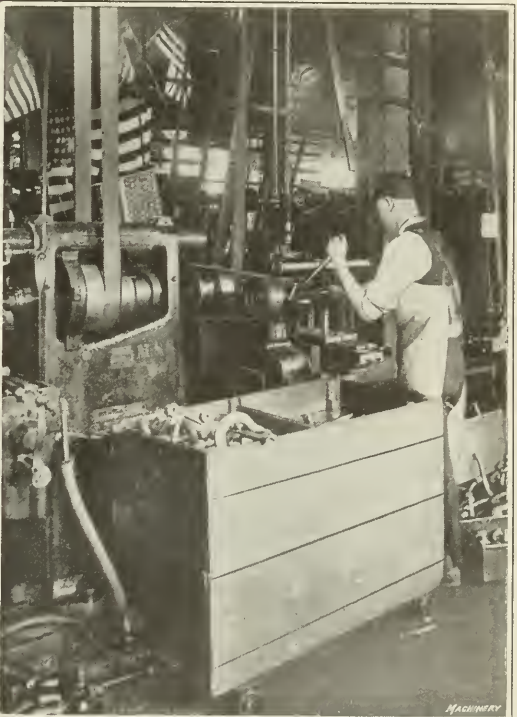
Forgings, castings, etc., delivered to machines for a specified operation must be kept separate from those on which the operation has already been performed. One truck for blanks and one for machined work take up considerable space. A better method is to have one truck with a partition dividing the space into a compartment for blanks and a second compartment for finished work (Timken-Detroit Axle Co.)
